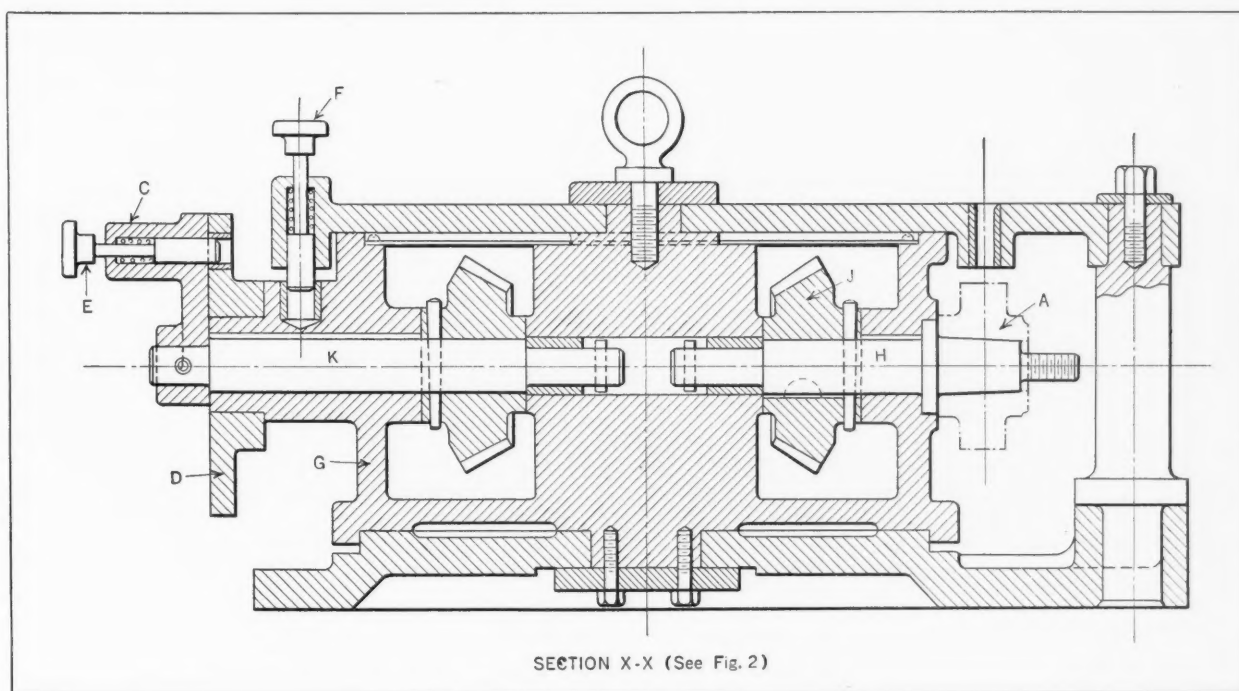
Another Sectional View of the Jig Shown in Figs. 1 and 2
